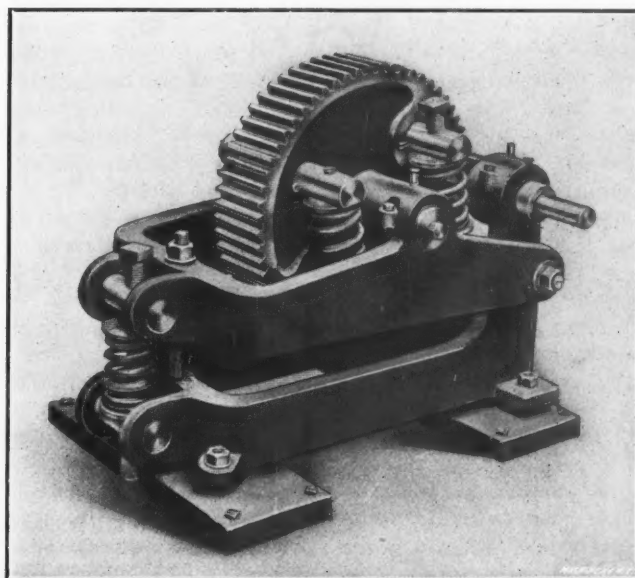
View of Gear Testing Machine showing Pivoted Frame and Spring for Measuring Thrust
